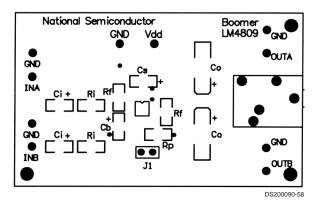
Recommended PC Board Layout Component-Side Silkscreen
